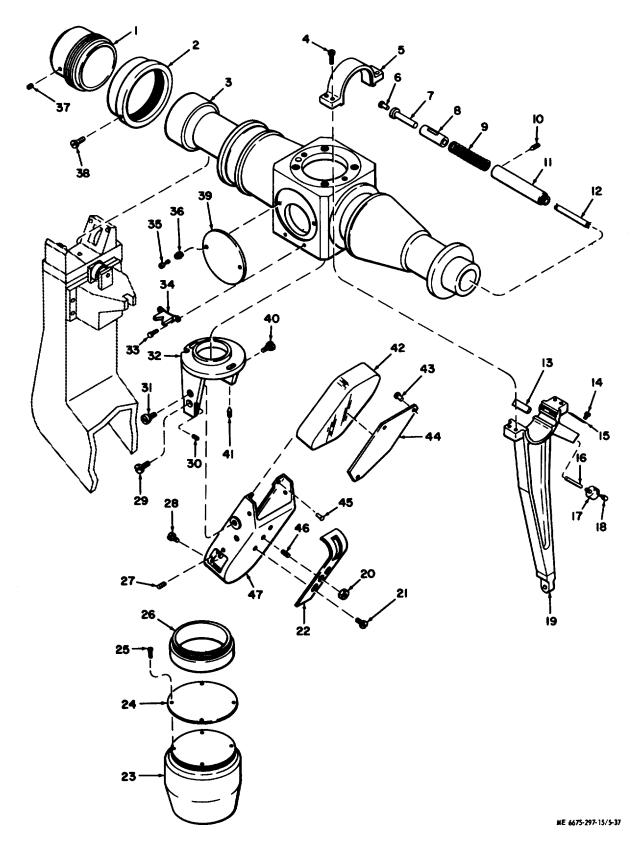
Counterweight, telescope mirror assembly, and vertical clamp arm; disassembly and reassembly.
